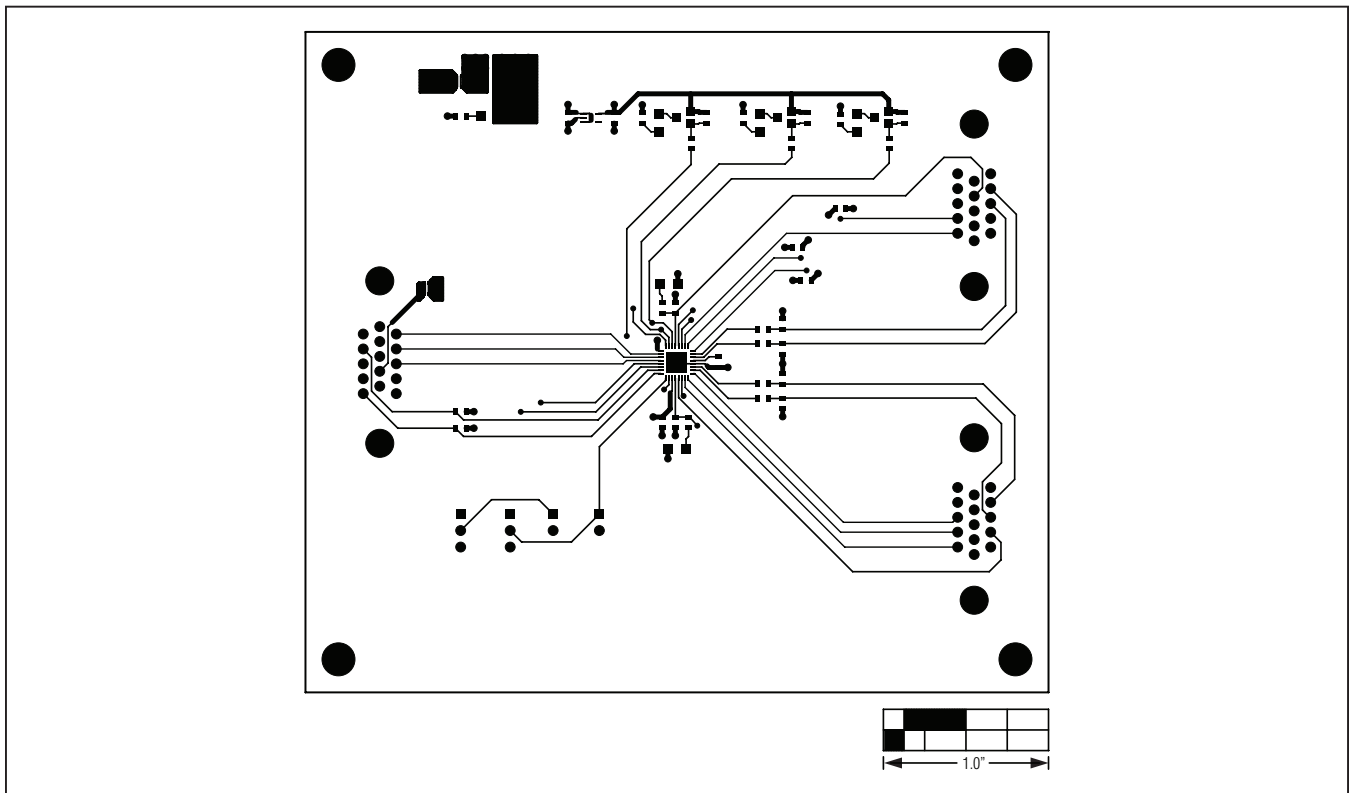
MAX14983E EV Kit PCB Layout—Component Side
